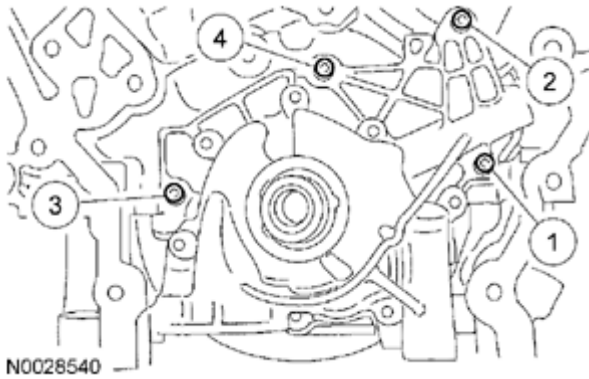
Identifying Oil Pump Bolts Removing Sequence
